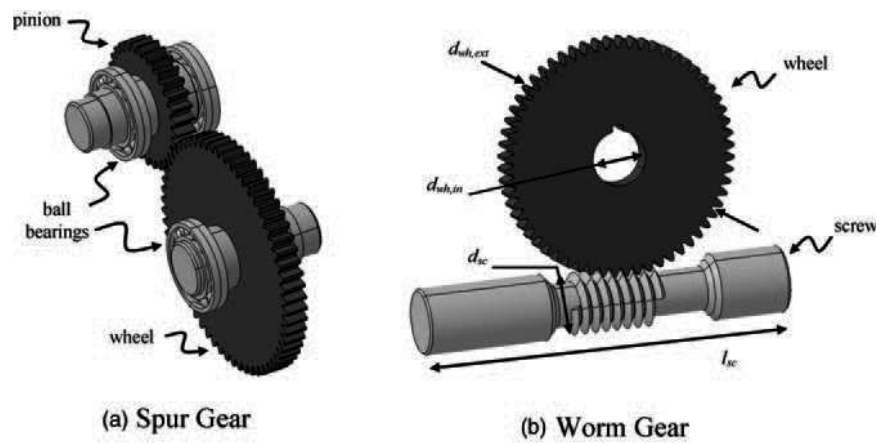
Gear assembly and worm gear reducers: (a) spur gear and (b) worm gear
